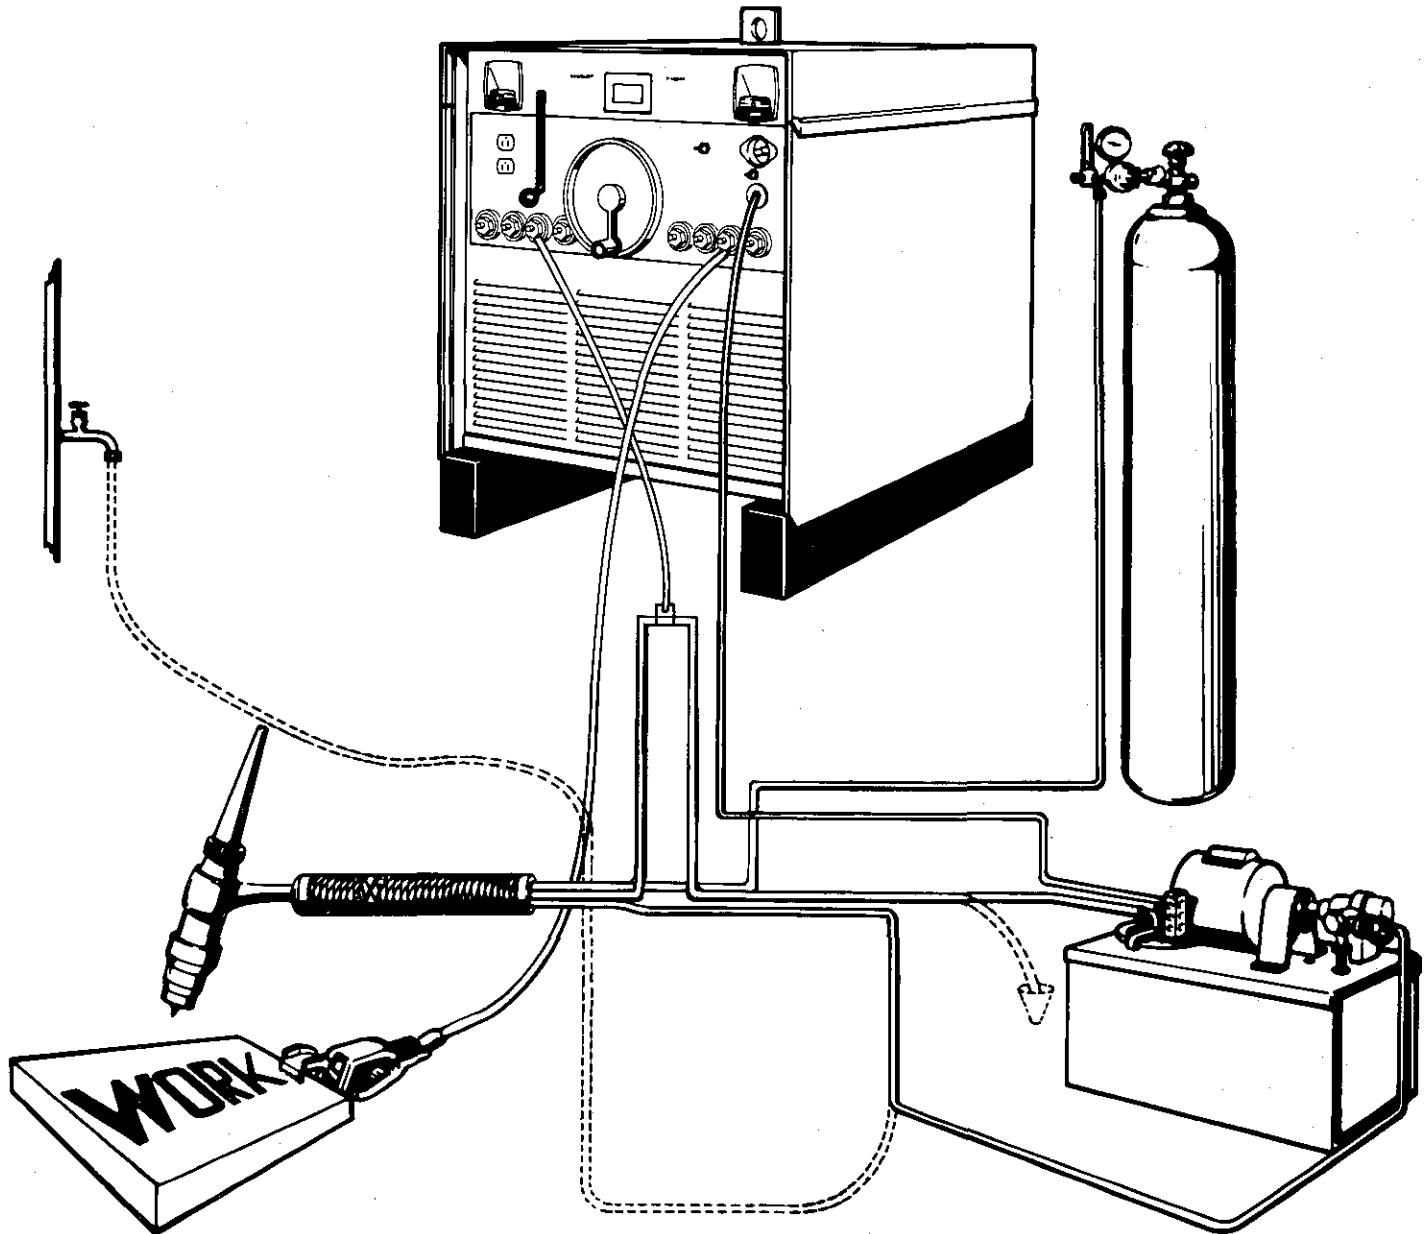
Connections for Gas Tungsten-Arc Welding (GTAW)
